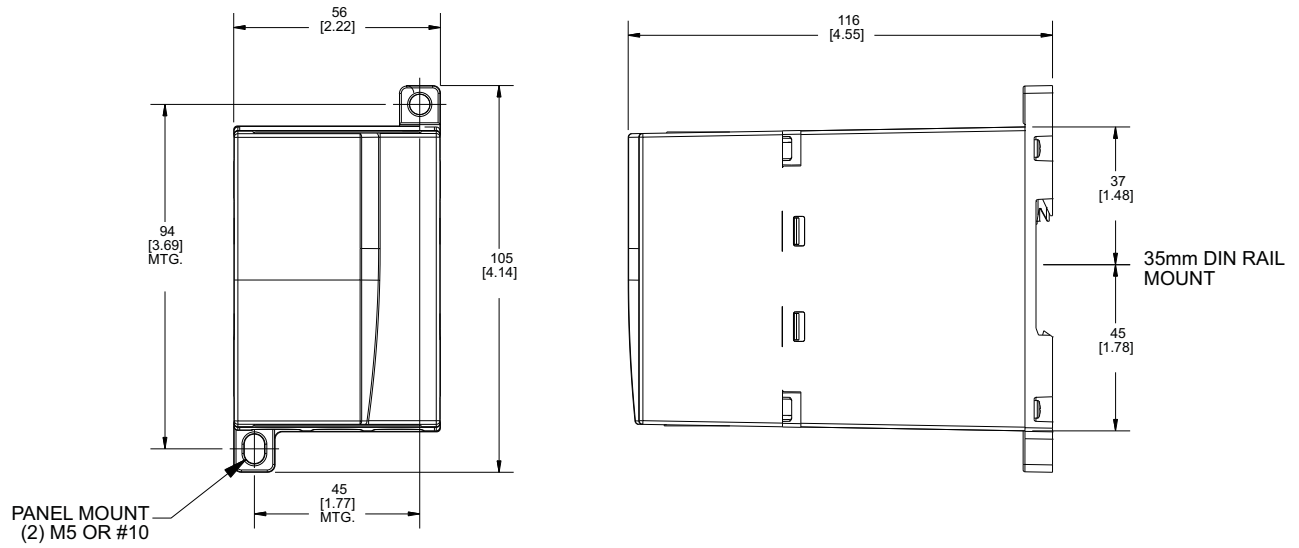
Stacked Base Control Module C445B... and Measurement Module C445MA... Mounting Dimensions
